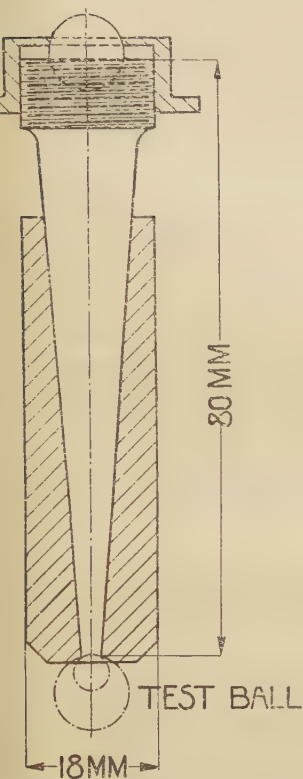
Magnetic Ball Holder for Vickers Hardness Testing Machine.
